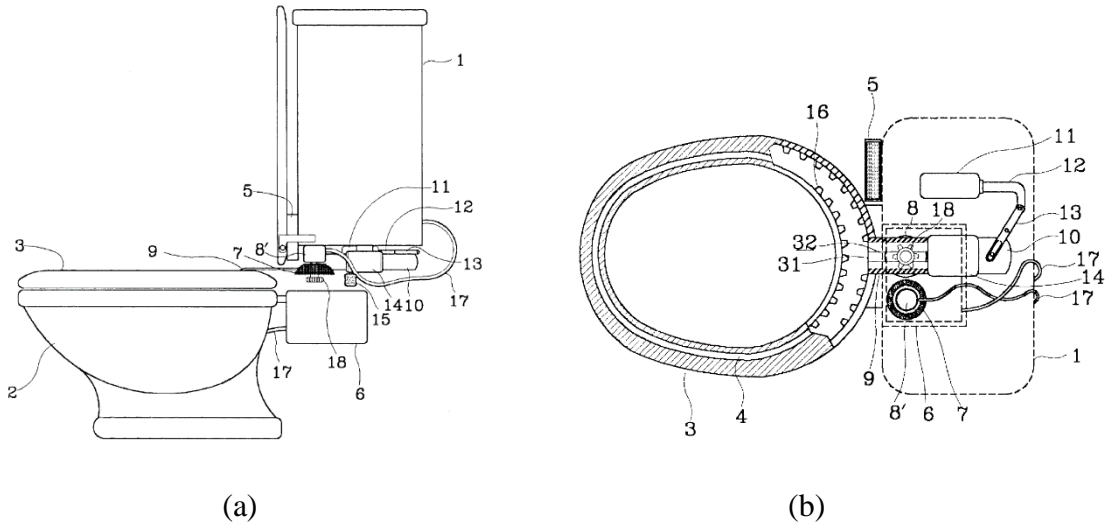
Design of automatic toilet seat cleaning system (a) side view; (b) top view [4]
